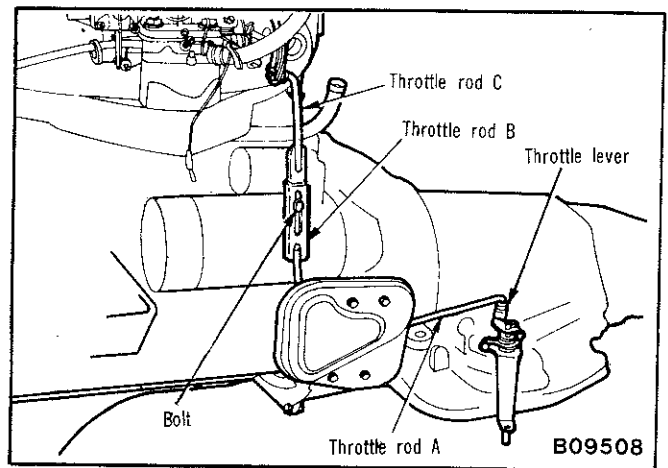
Transmission throttle linkage adjustment (MA904 A)
